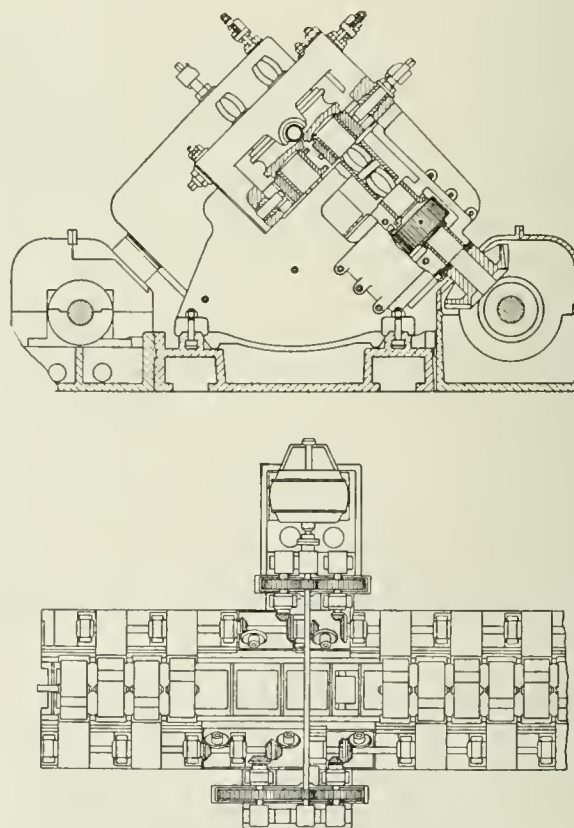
AN IMPROVED TUBE ROLLING MILL
